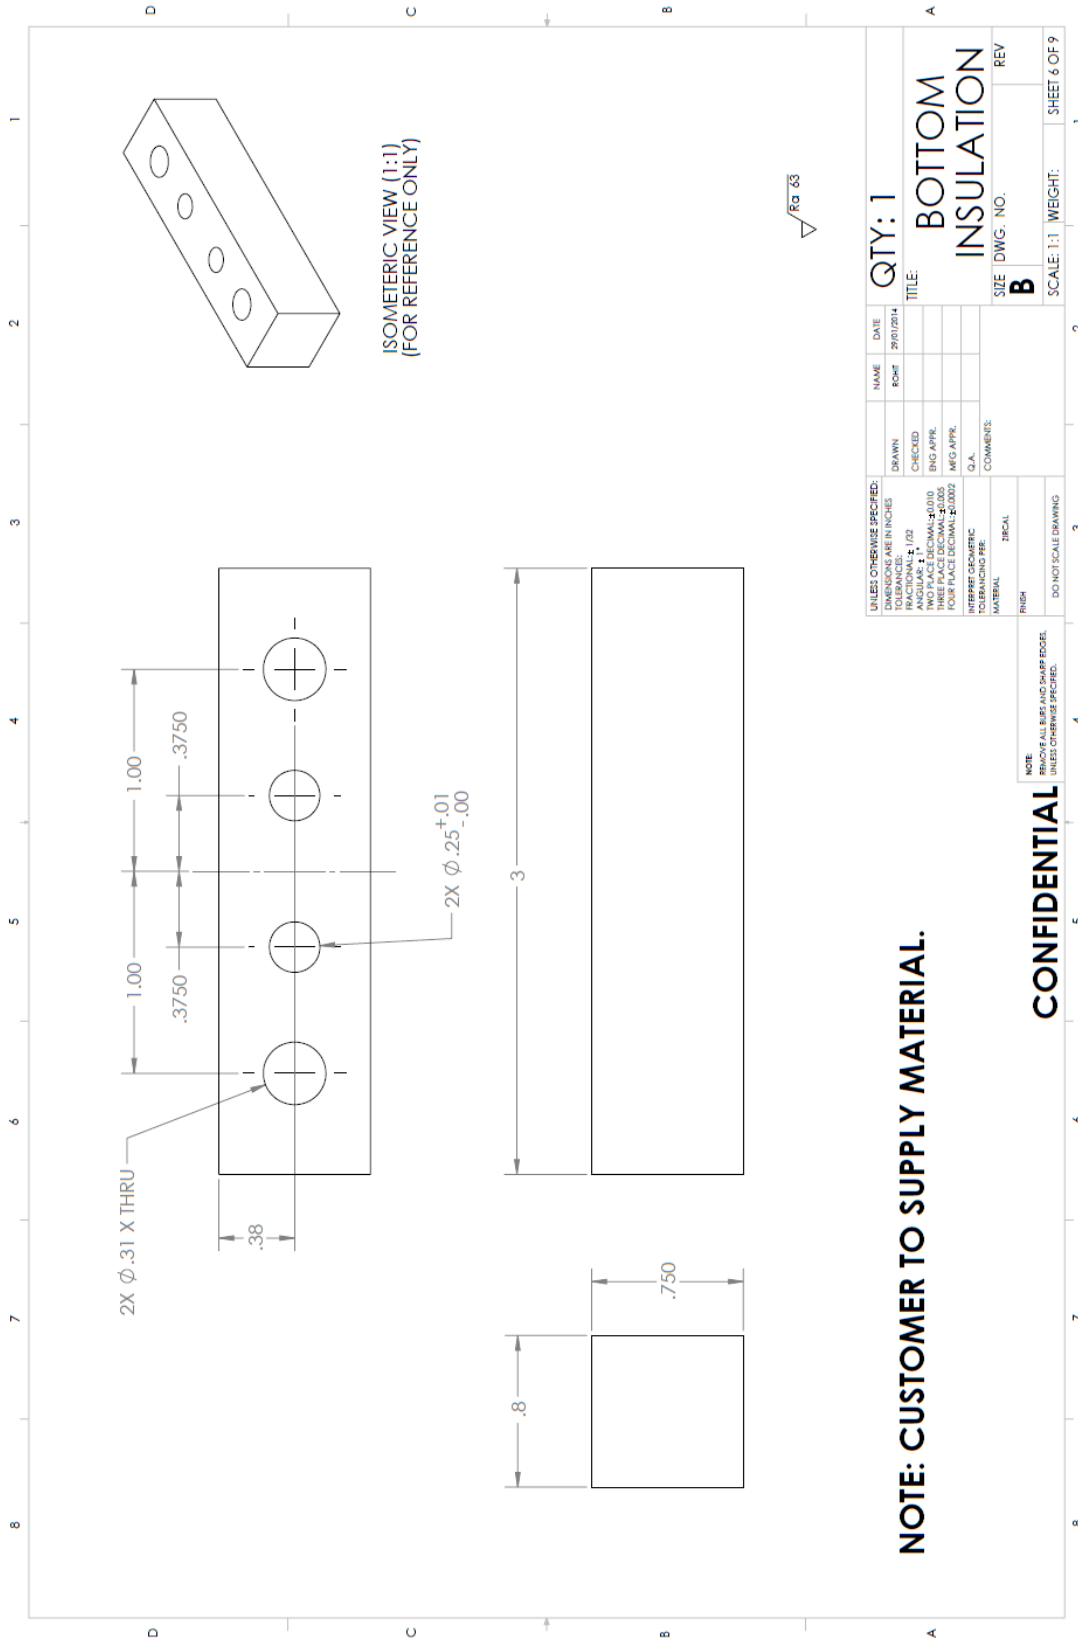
Detailed drawing of the insulation block used in the comprehensive springback study.
